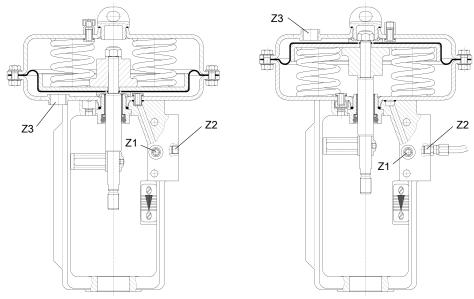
Air connections with additional equipment Z3 G 1/2"
